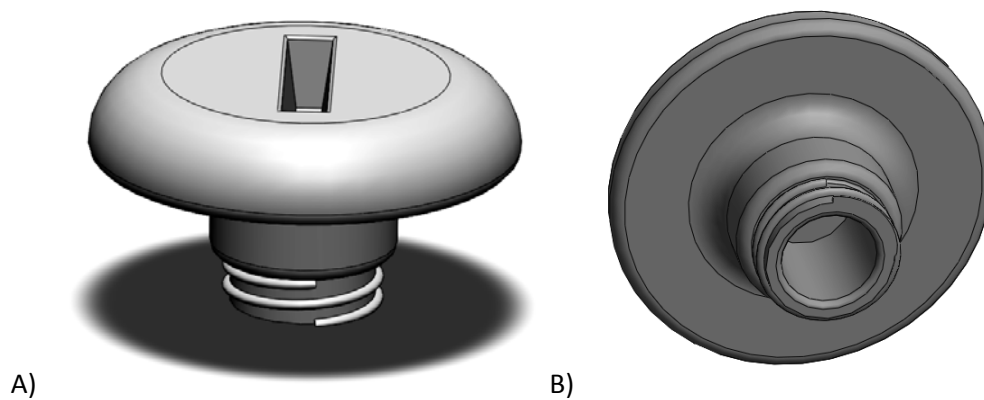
Images of the top cover of transdermal osseointegrated implantable device: A) top/side isometric view, B) side/bottom isometric view, dimensions: 30 mm outer diameter (at the widest point), 16.6 mm height, 7.5 mm internal diameter (within the threaded portion).
